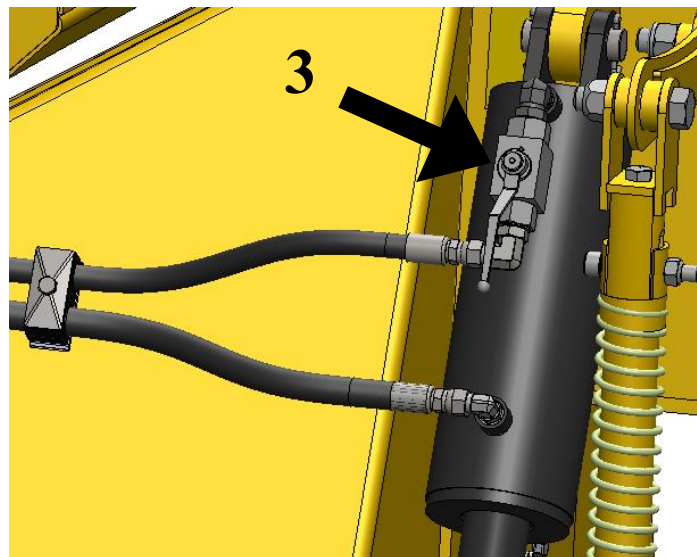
Tilt Cylinder Hydraulic on/off valve
